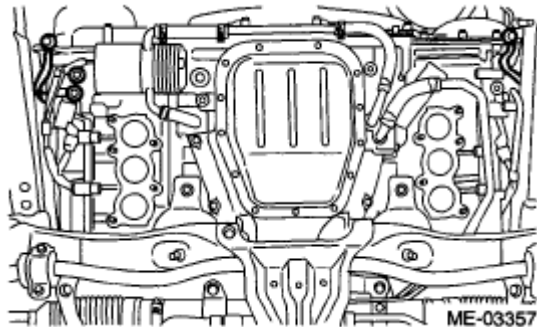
Identifying Ground Cable To Chain Cover Lower (Left And Right)
